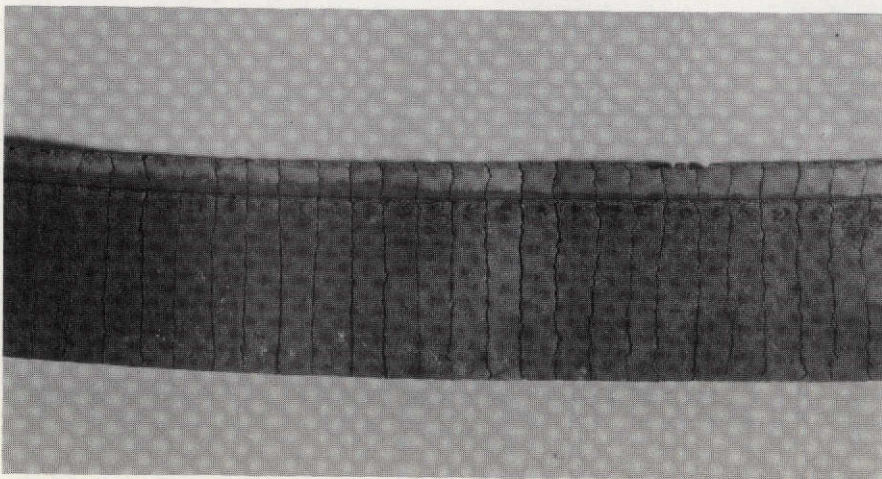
Supplier D Positive Plate After Bend Testing (TRW Photo No. 104824-73)
